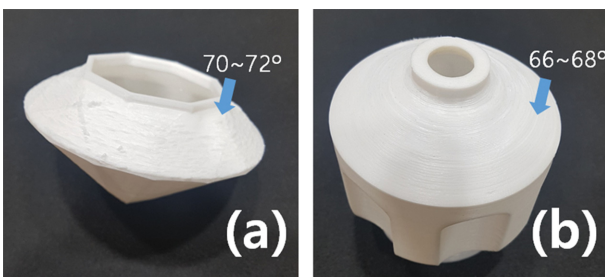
Output of 3D printing. (a) jewel-shaped pots, (b) geometric-shape vase.
